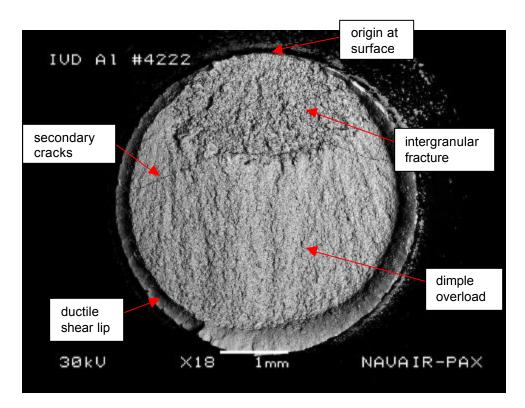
IVD aluminum sample #4222 fracture surface. This sample displays the type of surface most common to the test bars examined. (Reagent water test)
